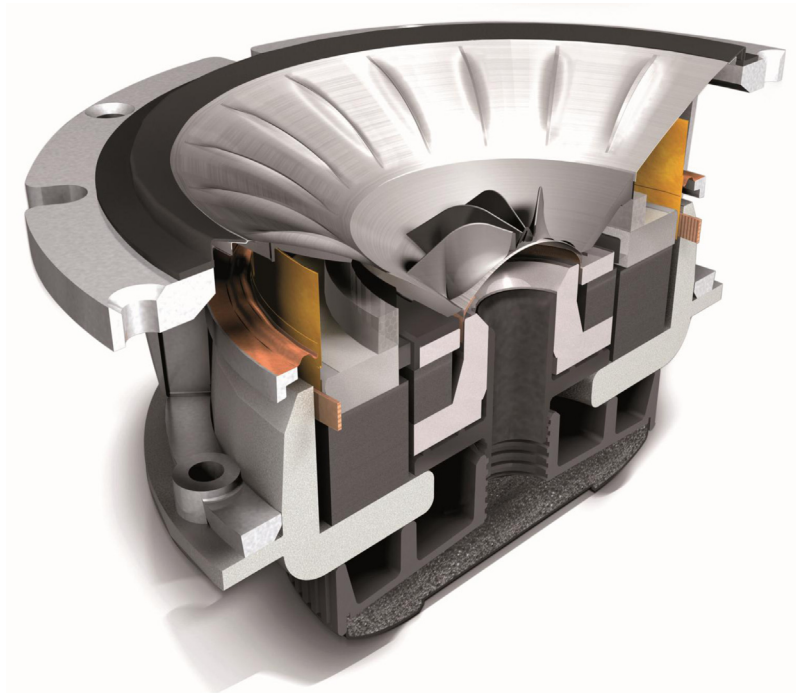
Section view of a Blade UniQ two-way drive unit.
